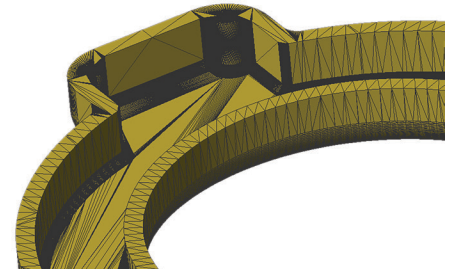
Smaller facets on a high-resolution STL file produces smoother surfaces.
